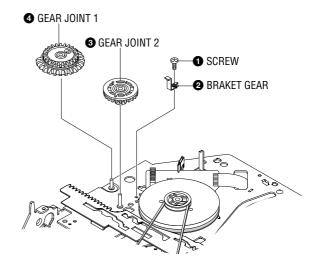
Bracket Gear, Gear Joint 1,2 Removal
